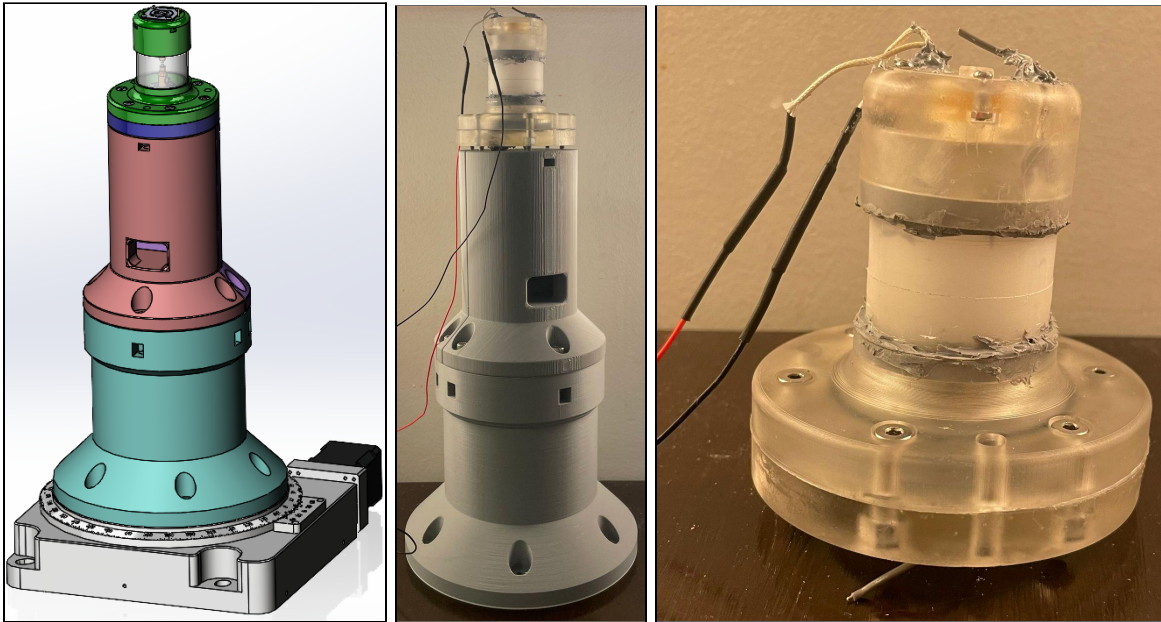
Physical prototype of the final x-ray microscopy device design compared to CAD model of final design. This build model was manufactured with the processes detailed in the Manufacturing Plan and assembled using the parts and materials found in the Bill of Materials. Structural components were 3D printed via SLA and FDM processes. The heat ring, transparent window, and graphite rods were CNC milled. Fasteners and sealing components were purchased commercially. Purchases of the load cell and linear actuator were omitted for the purposes of this report. Assembly was conducted manually by two individuals, with no jigs or holding devices required for construction. All empirical validation tests were conducted using one or more of the subassemblies built for the physical prototype.
